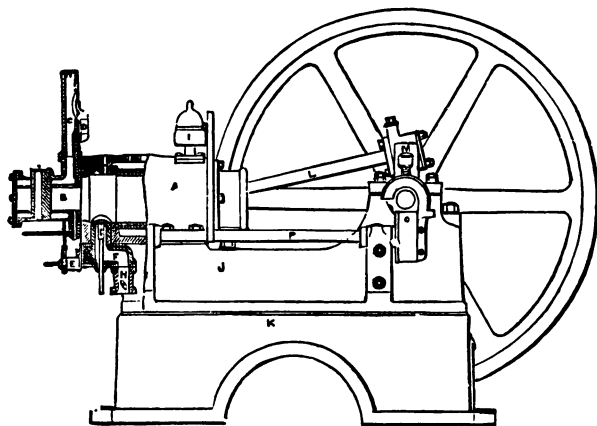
Section through Cylinder and Vaporiser of the Trusty Oil Engine.
